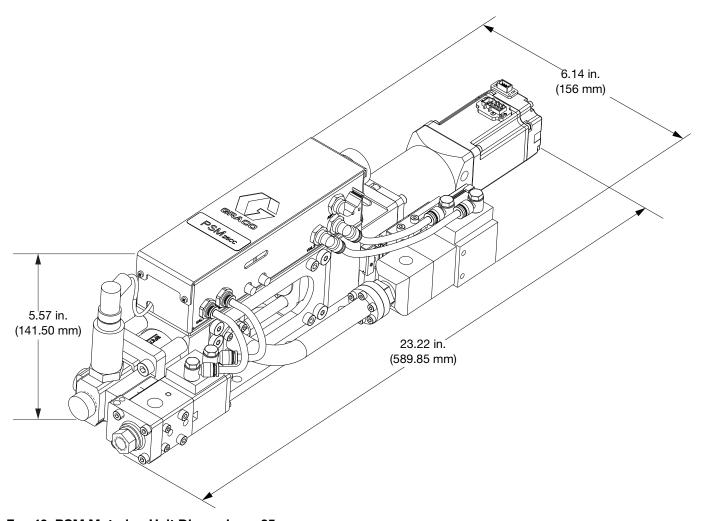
PSM Metering Unit Dimensions, 25 cc
